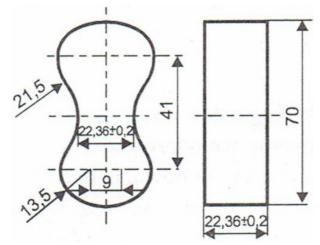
Scheme of tensile dog-bone test specimen [5]
